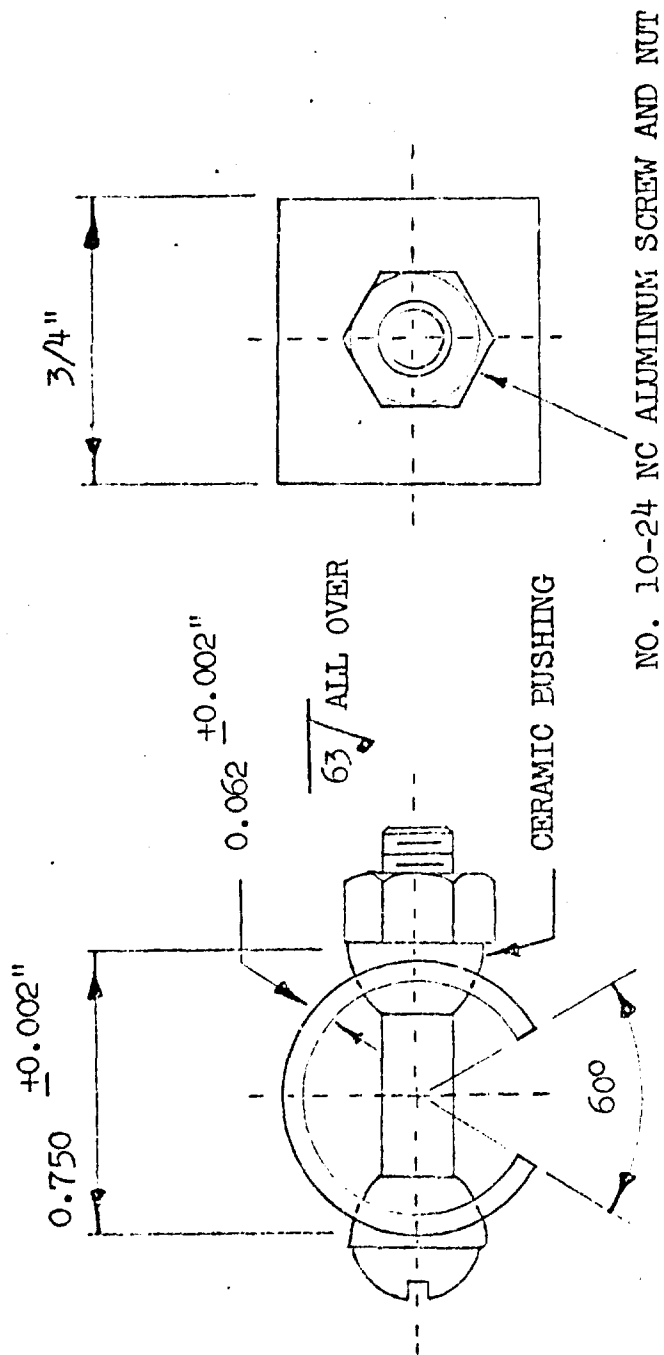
C-RING ASSEMBLY FOR PRESS-CORROSION TESTS
